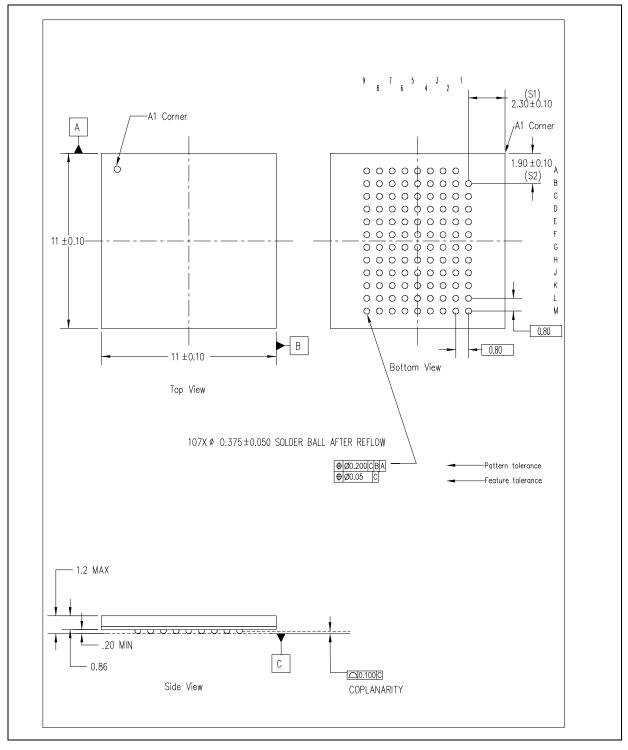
Mechanical Specifications: x16C (107-ball) package (11x11x1.2 mm)
